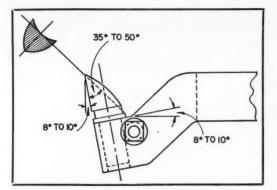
Drawing of Tool Holder Best Adapted for Machining Aluminum
